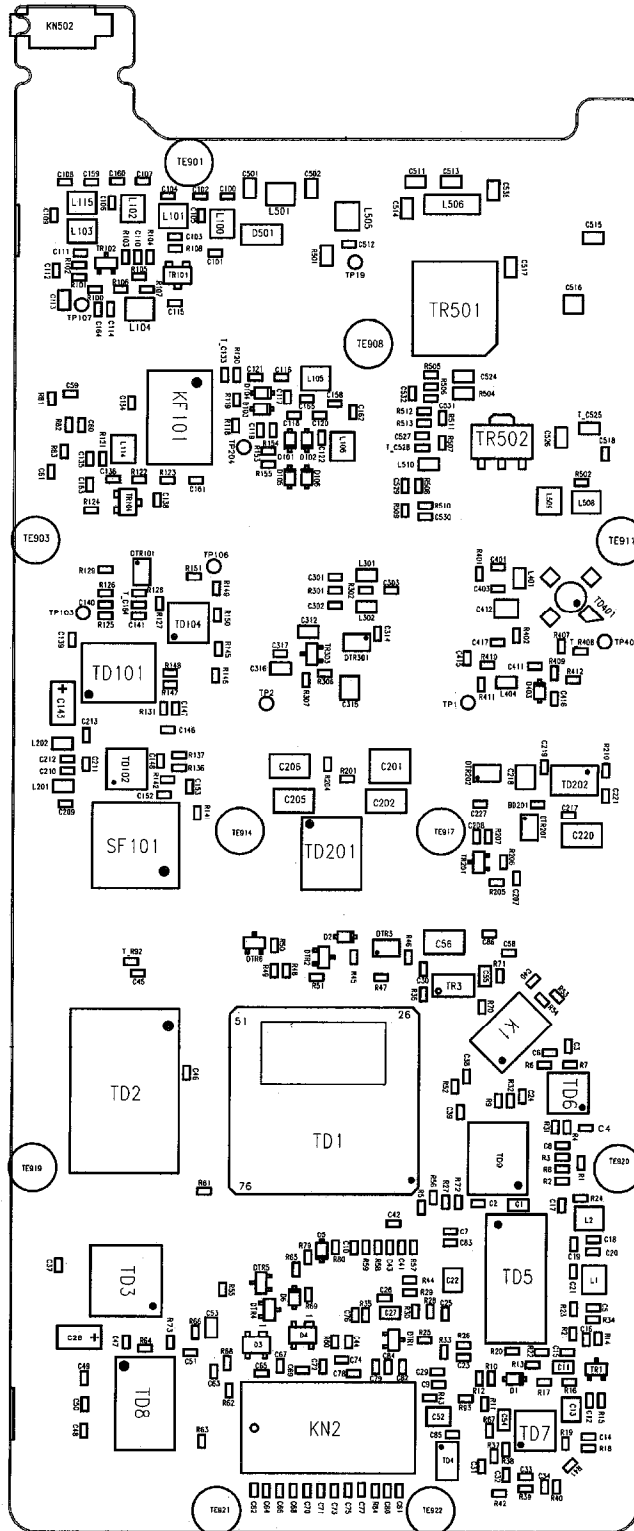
VHF RF and Control PCB Assembly Top Side
